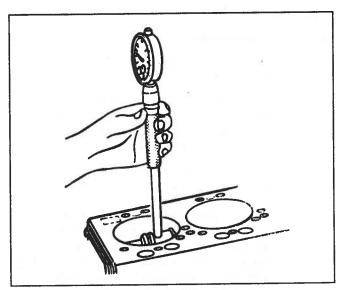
Using Telescoping Gauge To Check For Cylinder Taper And Out-Of-Round
